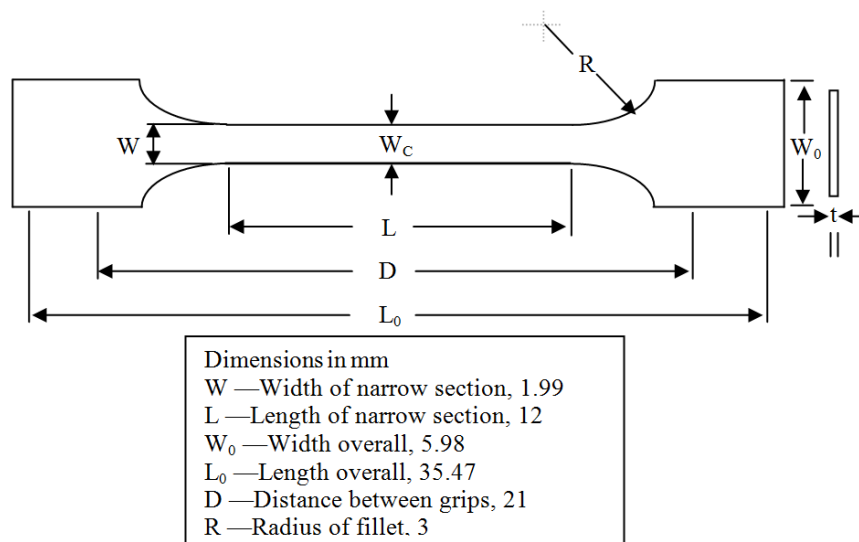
ISO 527-2 dimension for tensile test specimen
